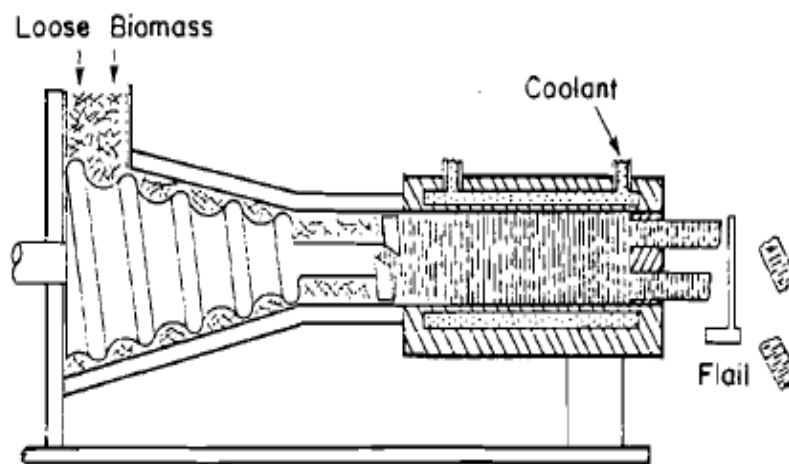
Conical screw press machine (Bhattacharya et.al.[5])
